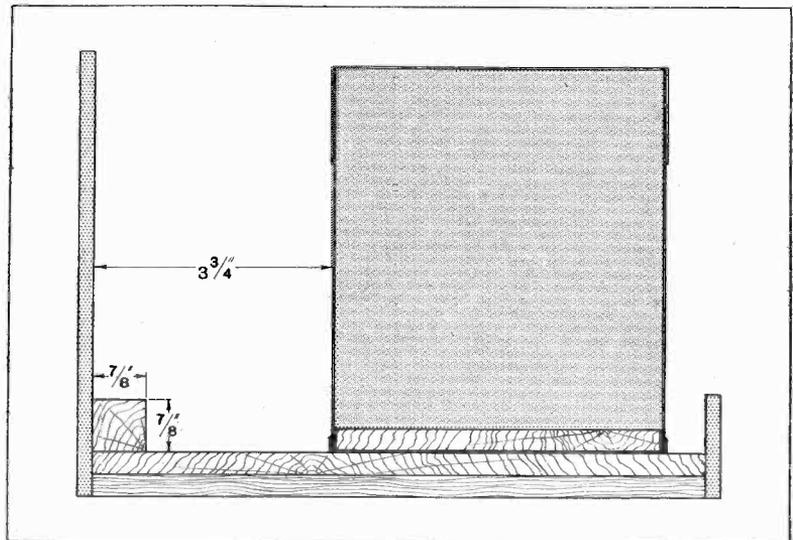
Position of copper box in the set. The parts enclosed in the box are mounted on the piece of wood. This drawing also shows the position of the baseboard, the end batten, the terminal strip, and the method of fixing the panel to the baseboard.
